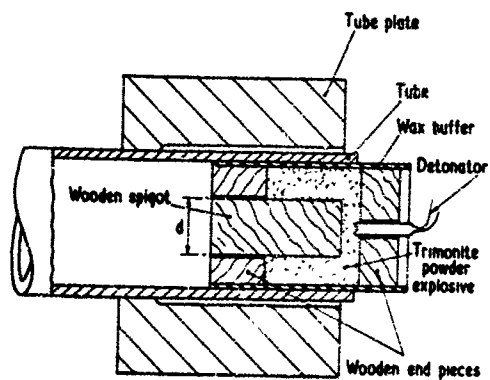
Explosive Pack for Individual Welding Tube to Tubeplate<sup>(4)</sup>.
